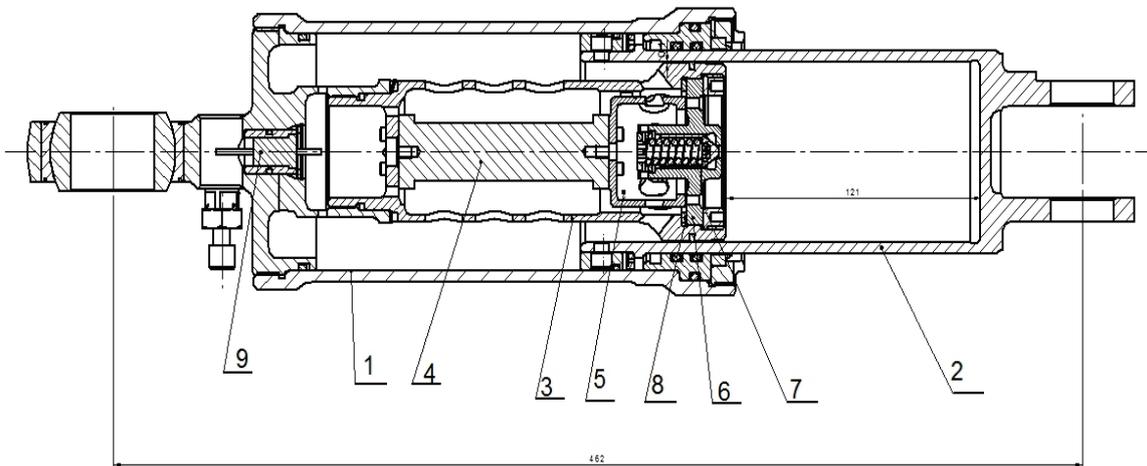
ADLAND project piezo-valve solution: 1 – cylinder, 2 – piston, 3 – plunger, 4 – piezo-actuator, 5 – valve head, 6 – suppressing plate, 7 – nut, 8 – adjusting plate, 9 – culvert. Source ILOt
